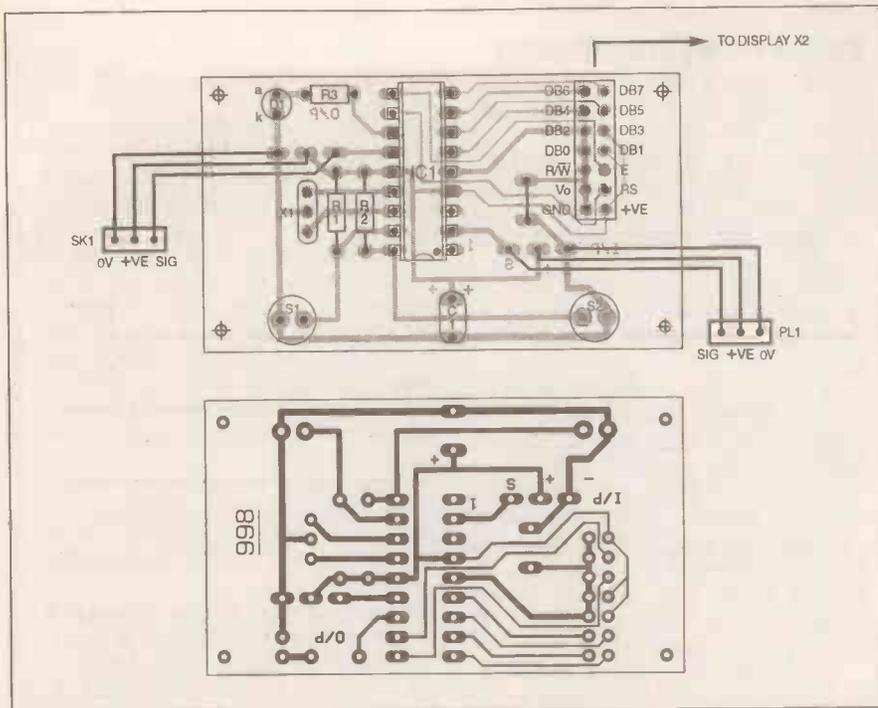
Printed circuit board component layout and full size copper foil master track pattern for PulStar.
